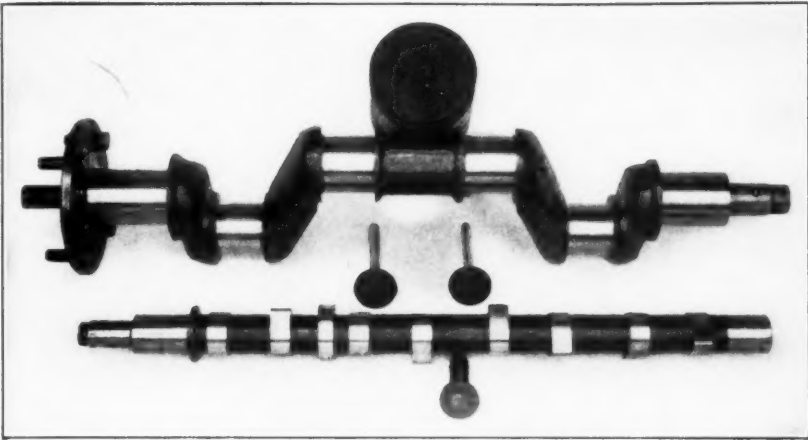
Crank Shaft, Cam Shaft, Piston Head and Valves
